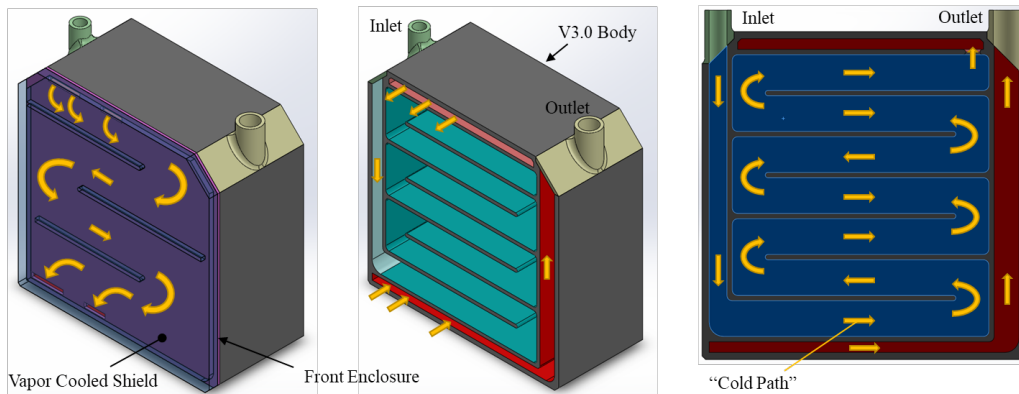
CAD views of prototype v3.0 showing flow/cold paths: full assembly (left); body only (middle and right)
